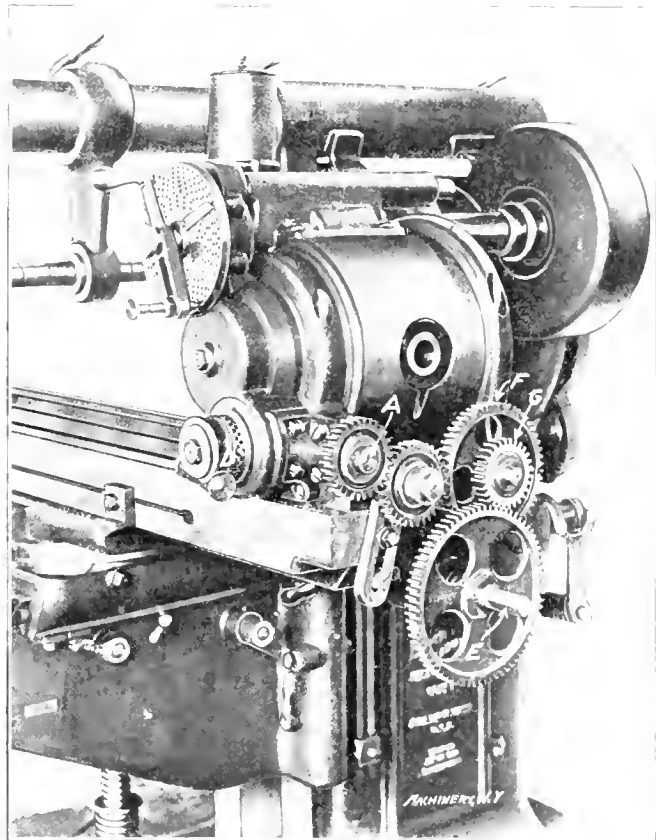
Universal Indexing Head in Place on Milling Machine.
